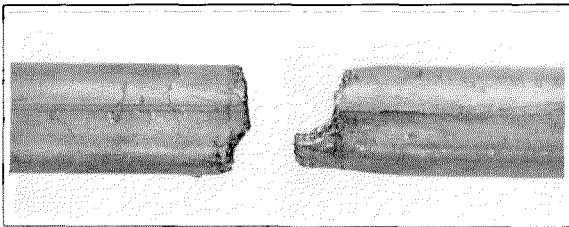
Typical Fatigue Failure—Unalloyed Lead Sheath.
